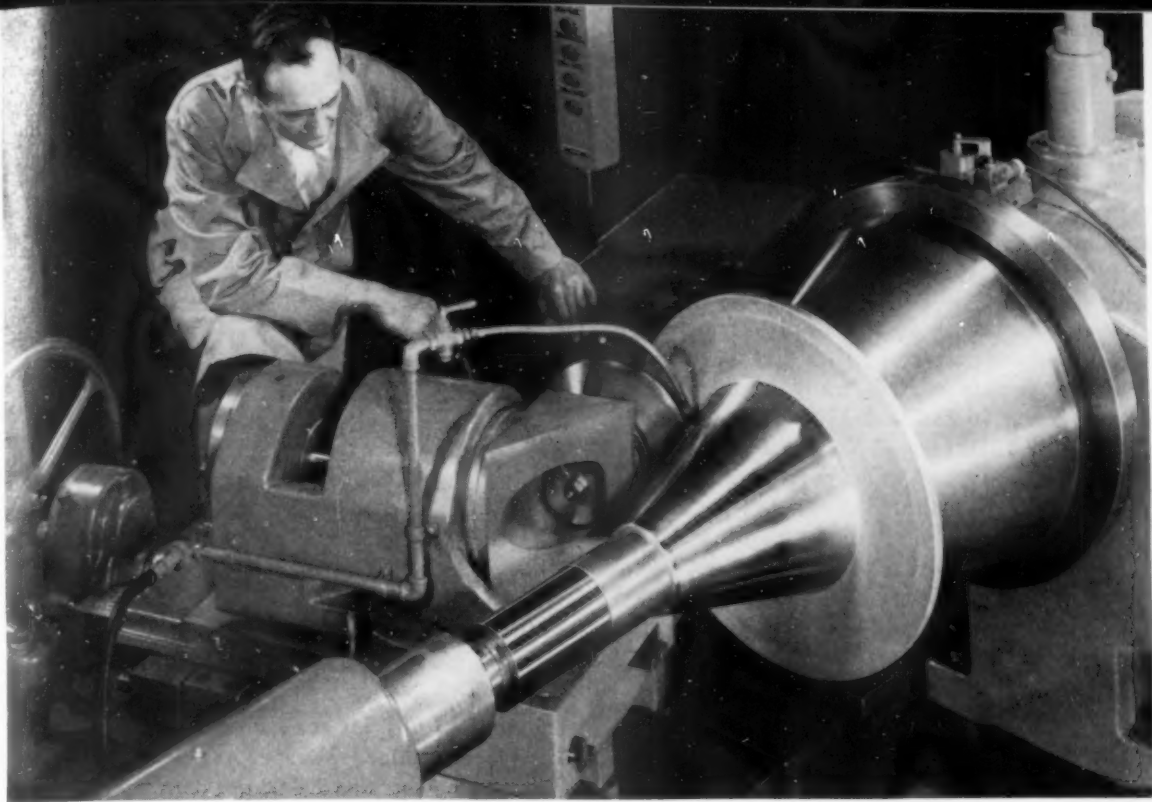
Forming a jet engine exhaust cone. A hardened disk cold flows a metal blank to the shape of the mandrel on the lathe spindle.
